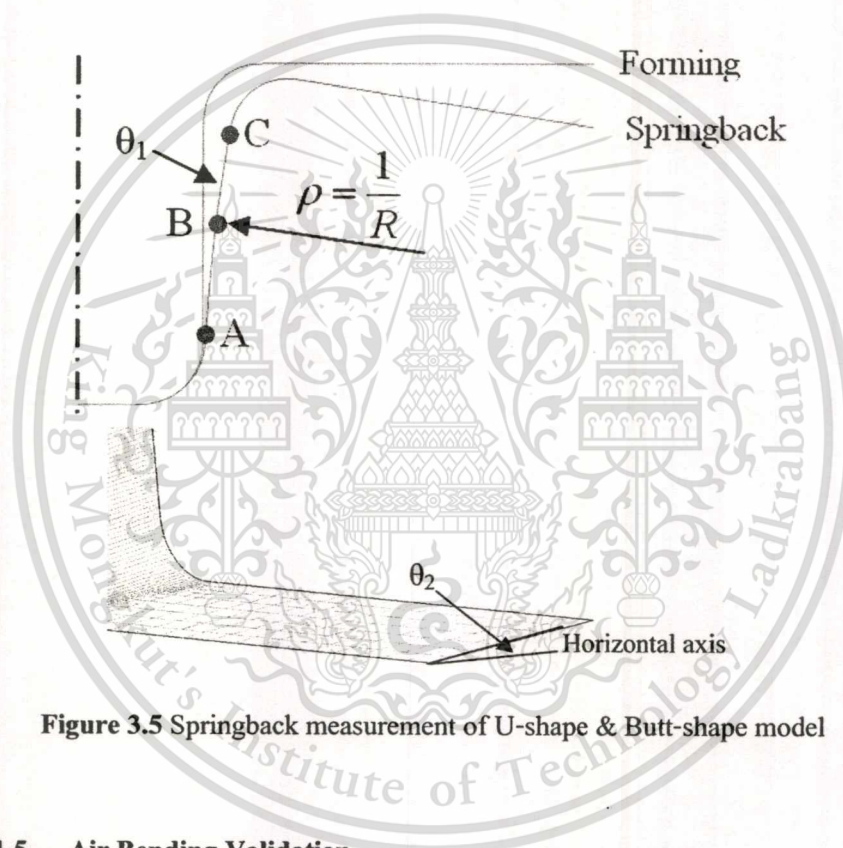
Springback measurement of U-shape & Butt-shape model
